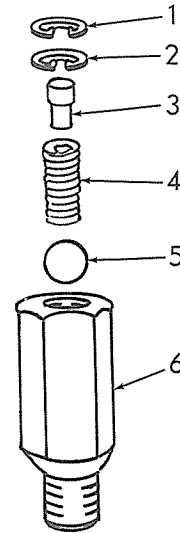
Fuel Pressure Relief Valve Details (T-71529)
